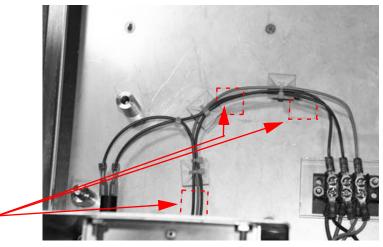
Secure Square Adhesive Cable Ties to Enclosure Bottom
